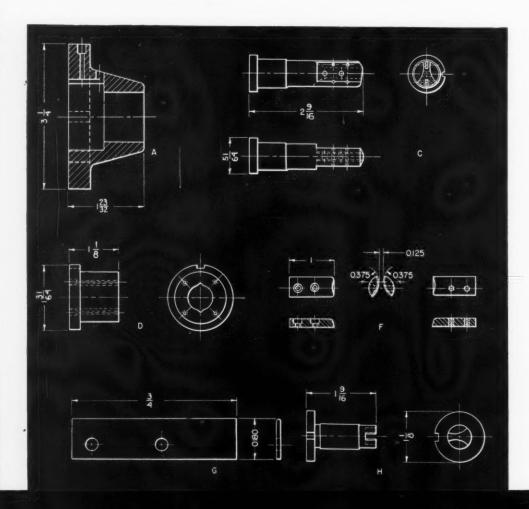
Details of Parts for Punch and Die Assembly, Showing Punch Nest A, Punch C, Stripper D, Inserts F and G for Forming the Projections and the Oil-grooves, Respectively, and Die H
